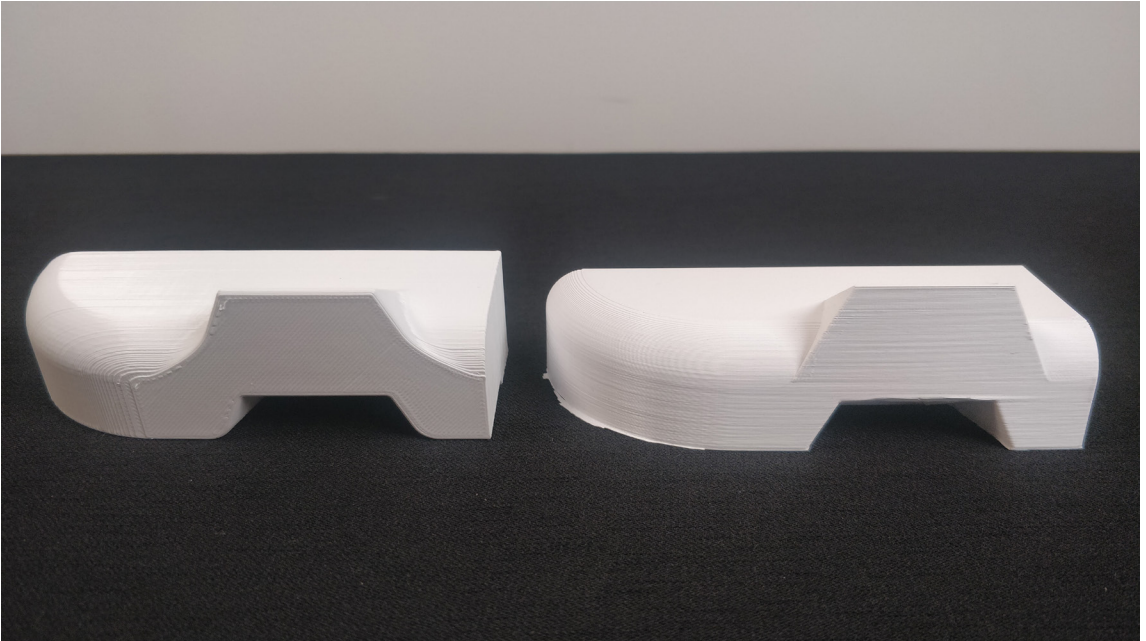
3D PRINTED PIECES WITH ROUNDED EDGES
